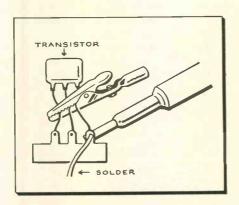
When soldering-in a transistor, diode or small wattage resistor, an alligator clip is placed on the lead being soldered. Clip is a heat sink to dissipate excess heat which may damage component.
